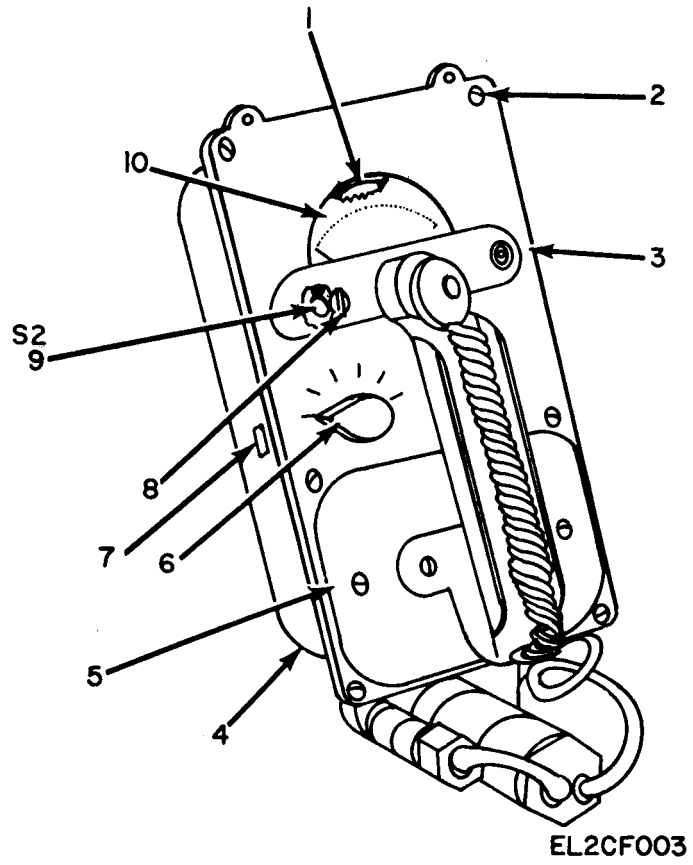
Radiac Meter IM-203/PDR-27R, Cover Assembly.
